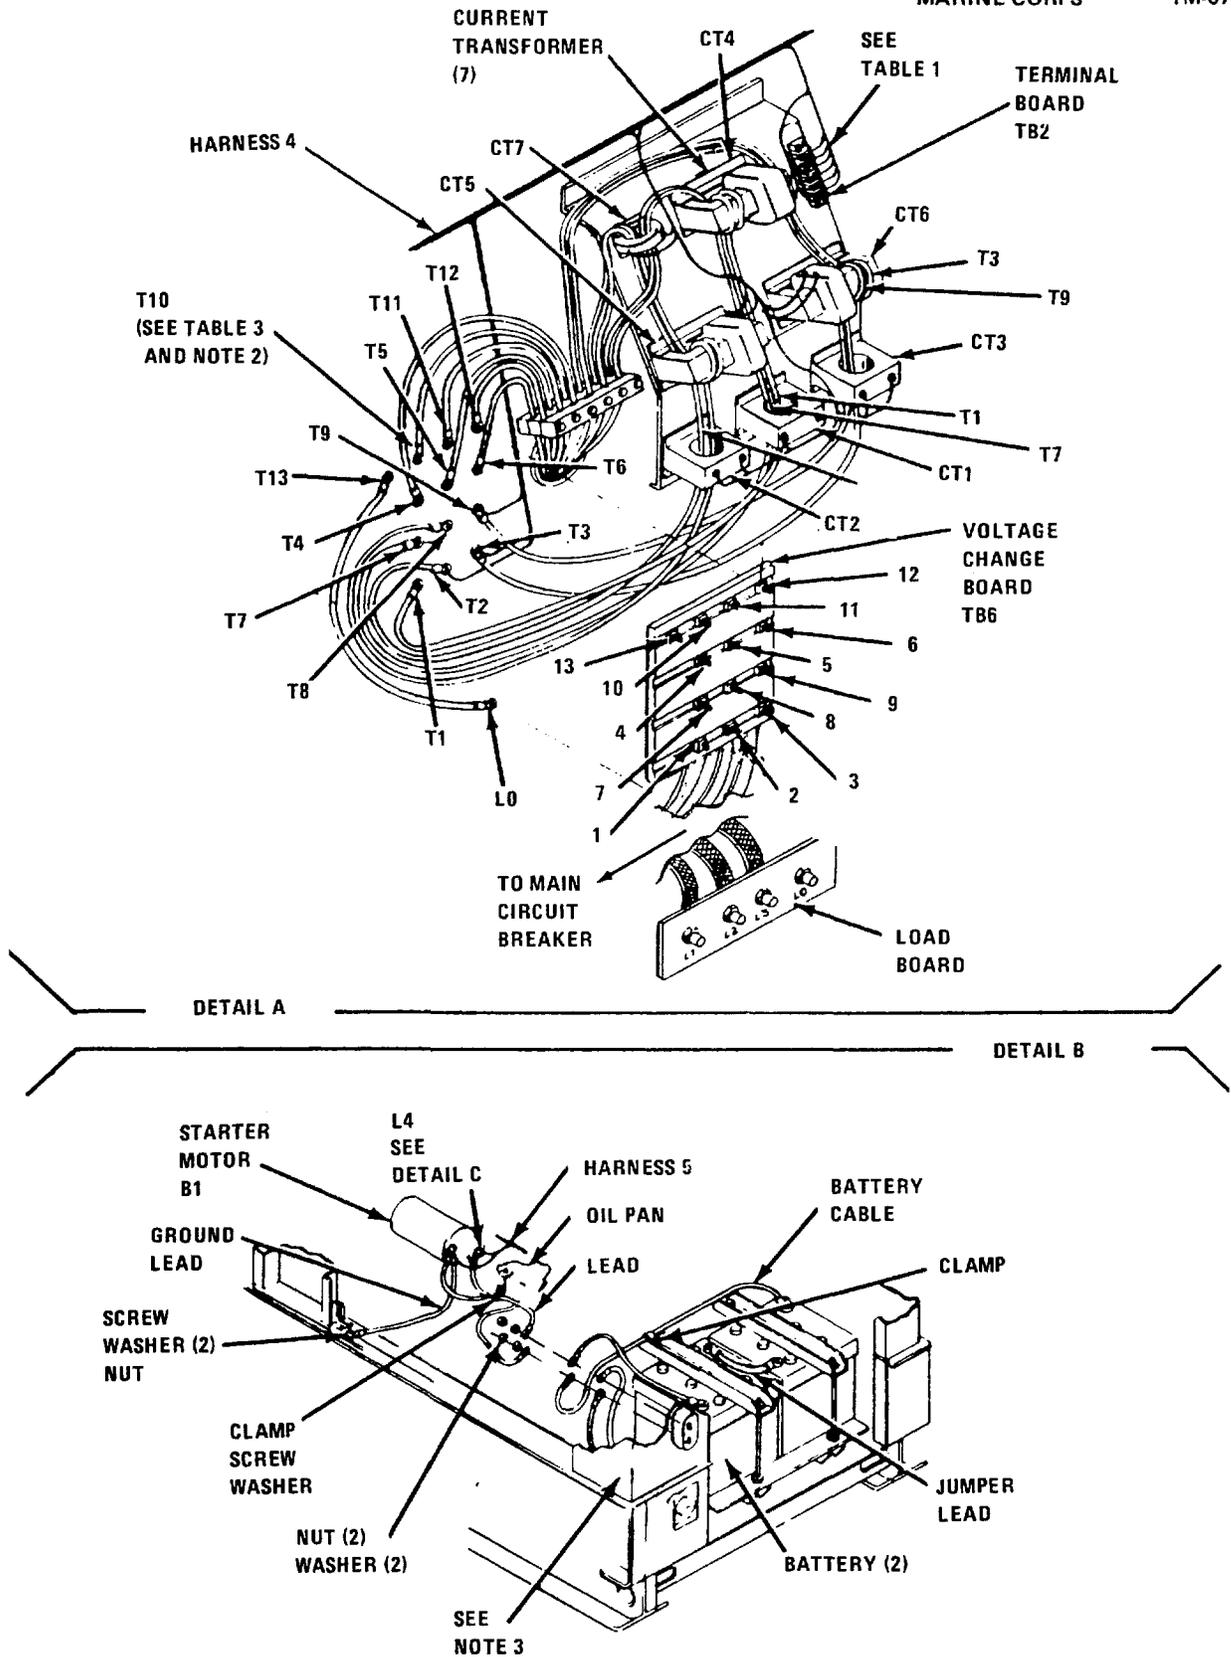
Wiring Harnesses, Removal and Installation (Sheet 4 of 5)
